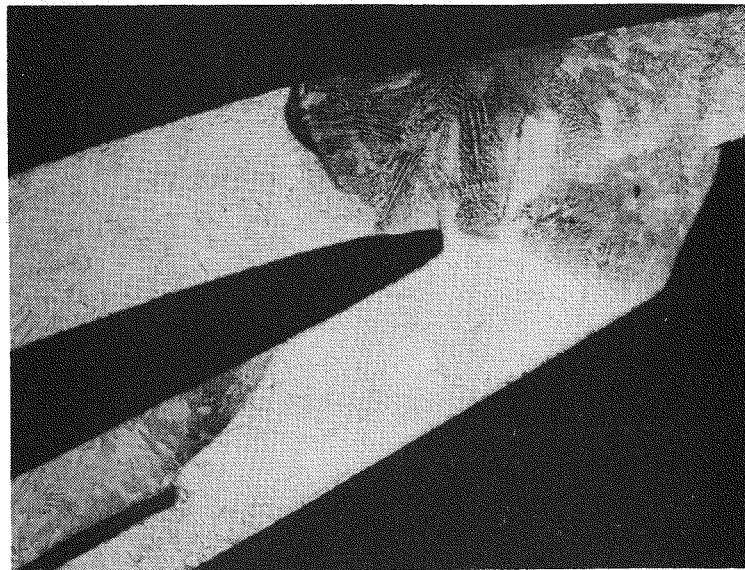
Typical metallographic cross section of closure cap weld.
